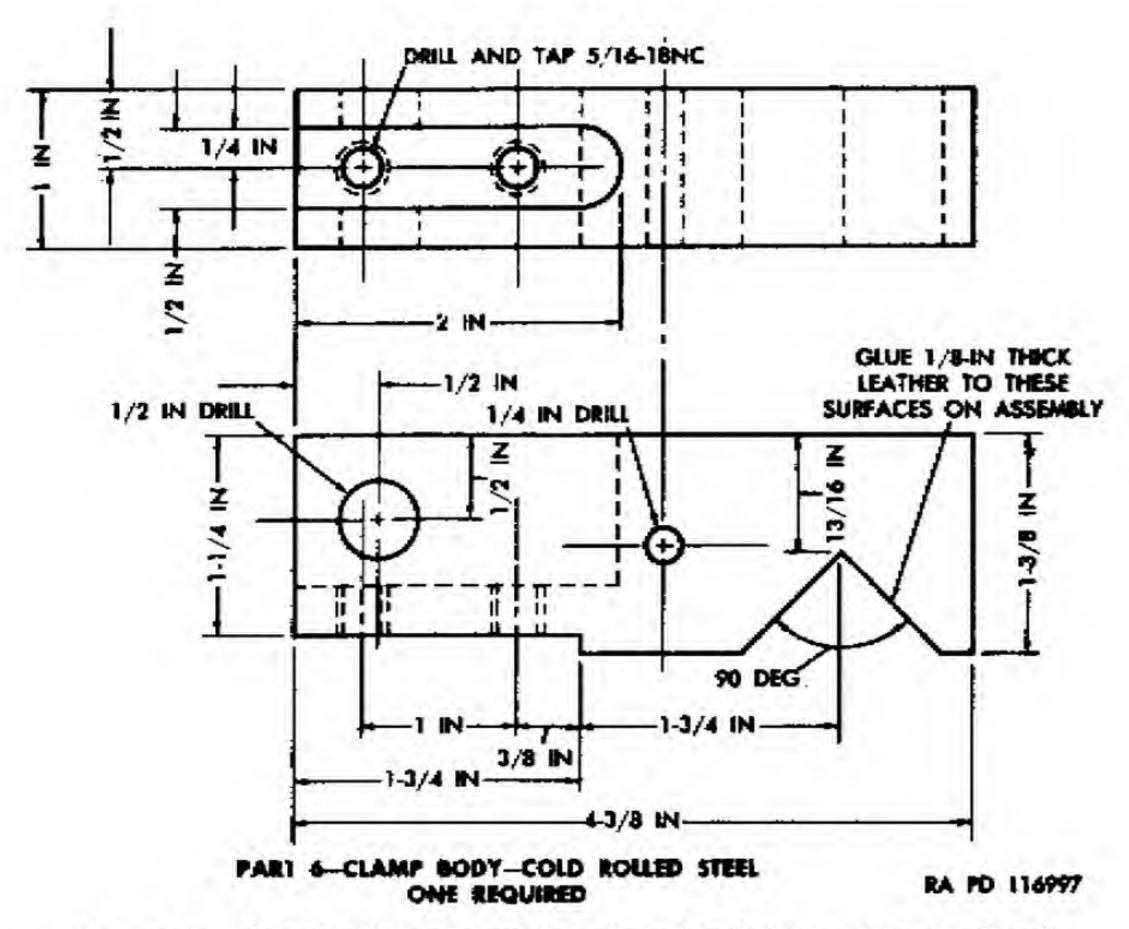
Detail of bench-mounted stamping fixture—part number 6.
